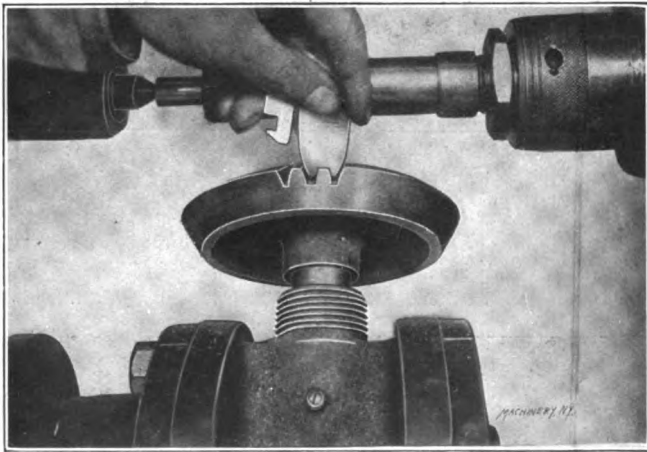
Testing Accuracy of Settings for Approximating the true Tooth Form.
